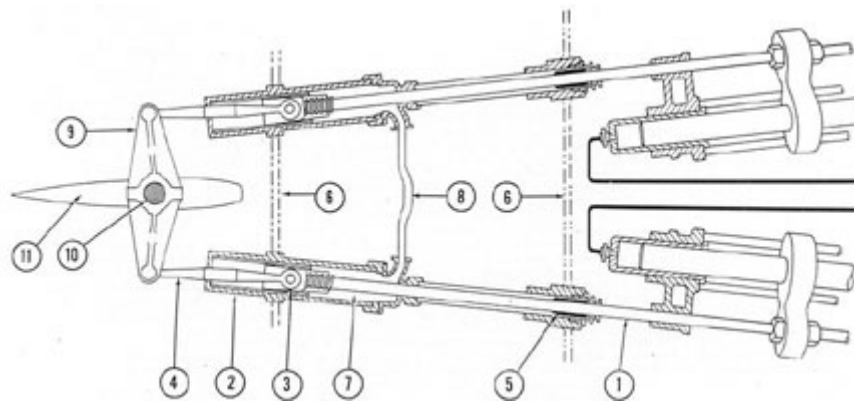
Diagram of rudder assembly and guides. 1) Inboard connecting rod; 2) connecting rod guide cylinder; 3) guide piston; 4) outboard connecting rod; 5) packing; 6) pressure hull; 7) forward (closed) end of guide cylinder; 8) equalizing line, or bypass; 9) crosshead; 10) rudder stock; 11) rudder.
